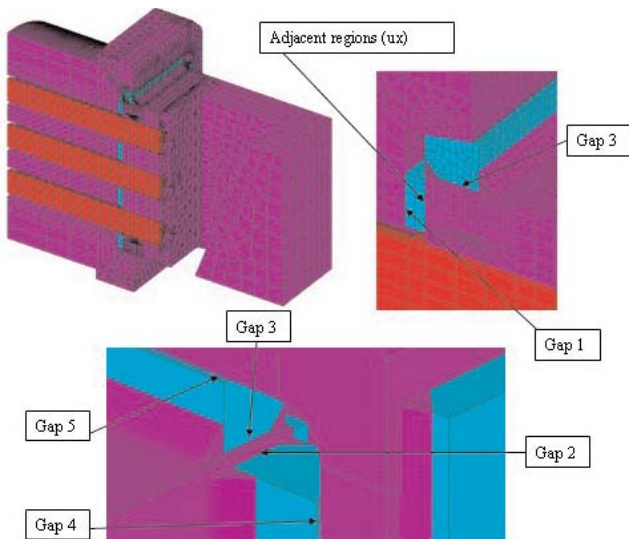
Parametric model for CSE wedge analysis. Wedge and shim plate gap variations due to manufacture, assembly and weld shrink tolerances (WUT, IPP)
